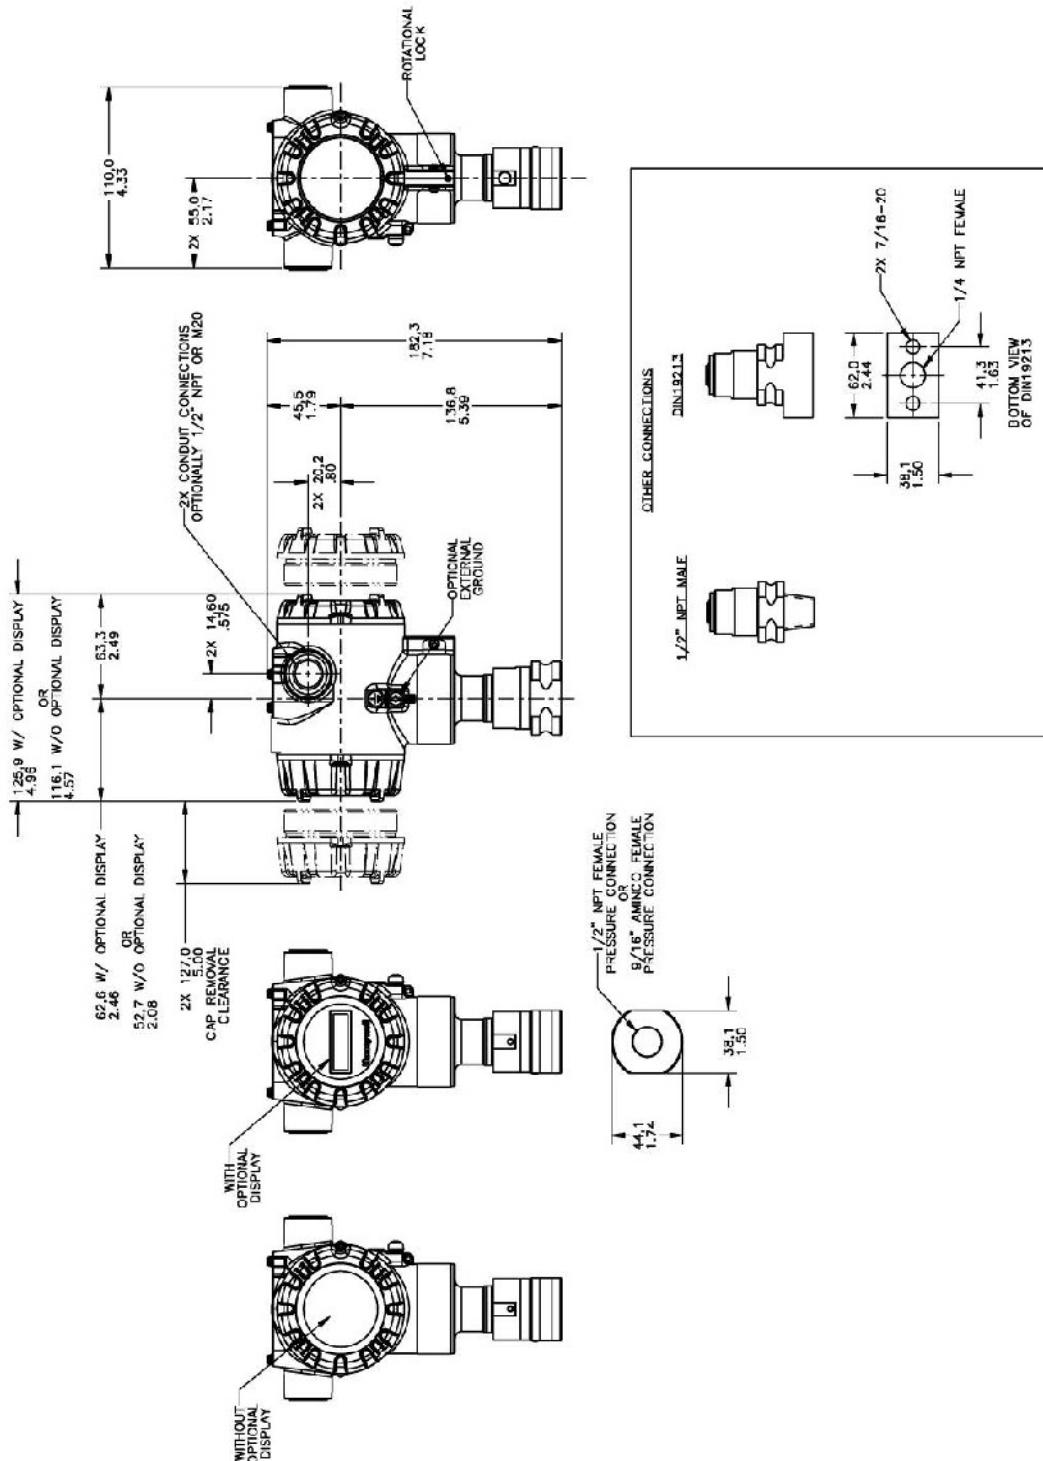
Typical mounting dimensions of STG84L, STG87L, STG88L, & STG89L for reference
